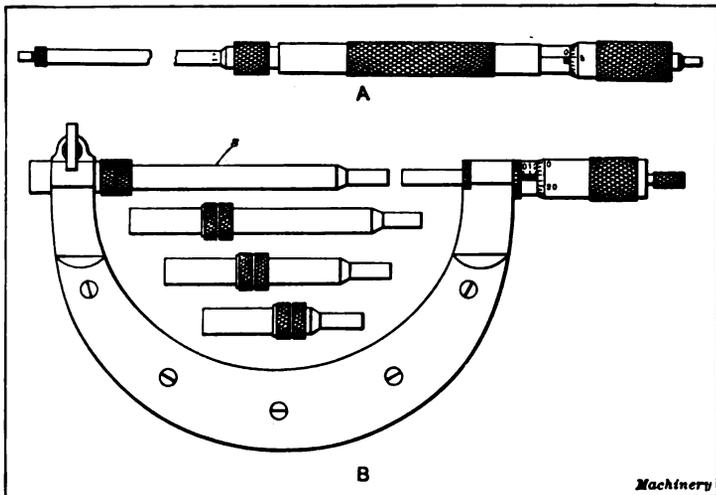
(A) Inside Micrometer Gauge for Large Holes
